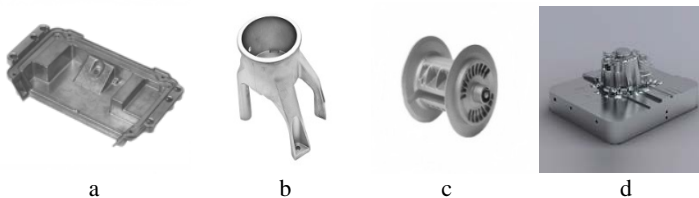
LTH Learnica products a. automobile part, b. anti vibration component, c. spool, d. tool making
